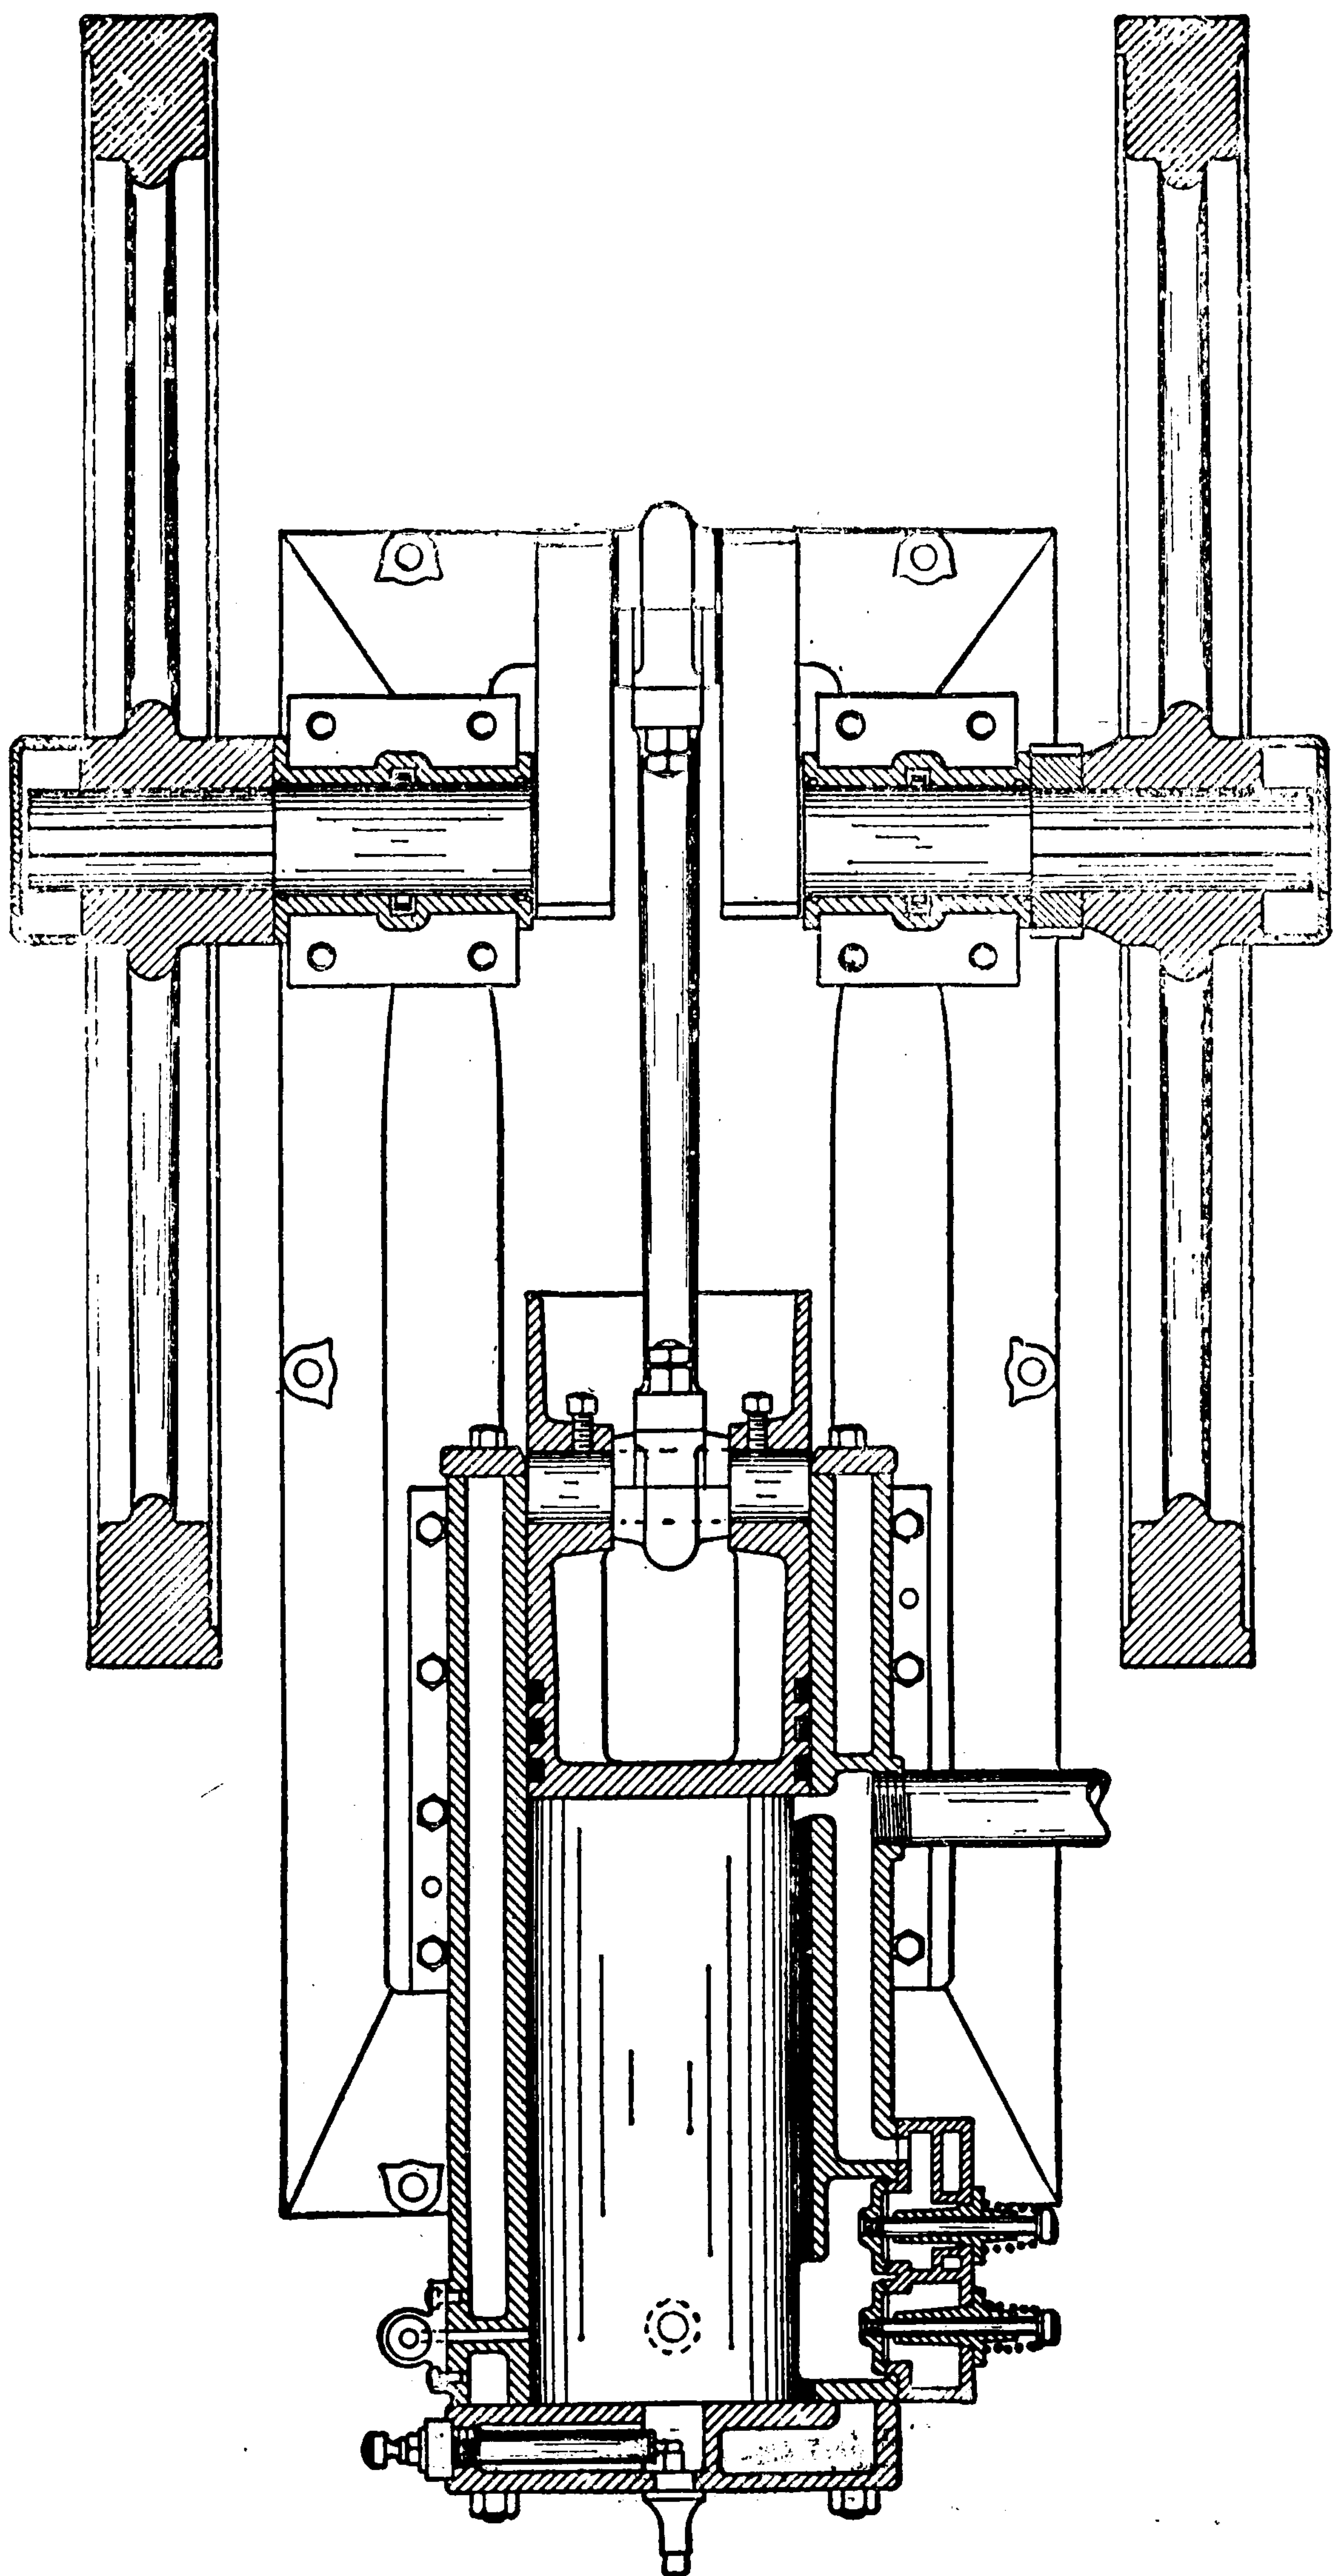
SECTIONAL PLAN OF THE "FAIRBANKS."
